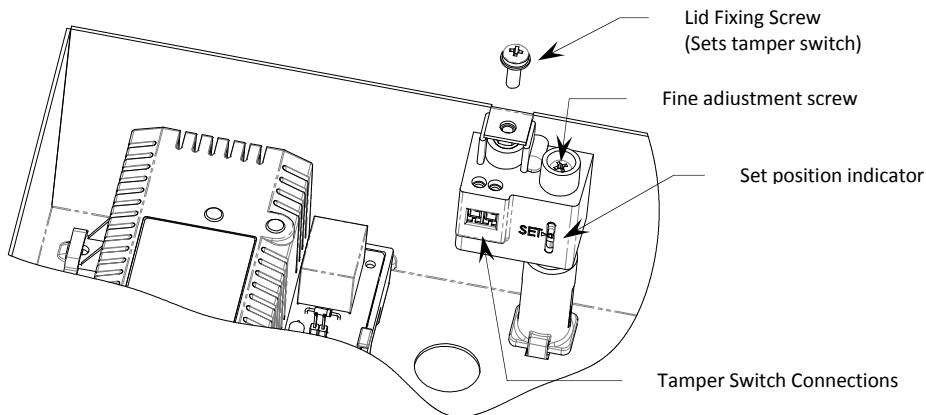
Position of tamper assembly on 'hinged lid' style enclosures
